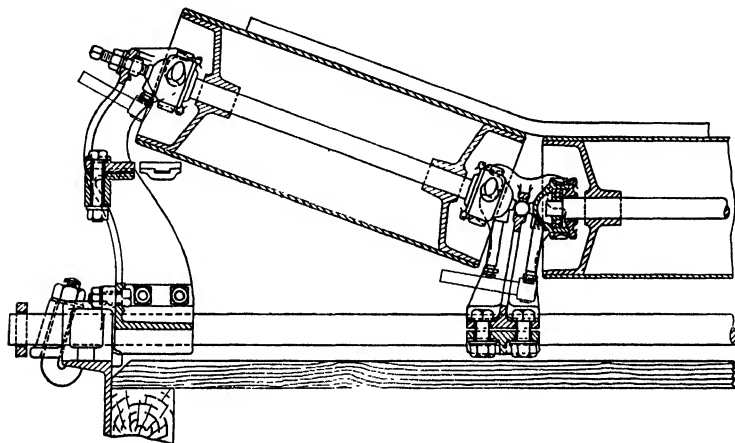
48-inch Three-pulley Idler for H. C. Frick Coke Company at Colonial Dock.
